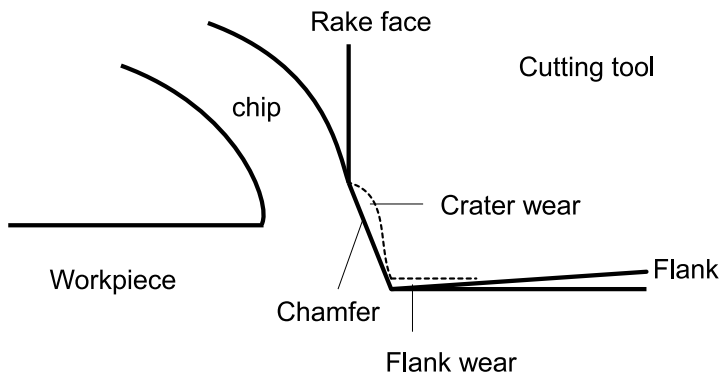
Schematic figure of the chip, workpiece and cutting tool. The dotted line represents a worn cutting tool.
